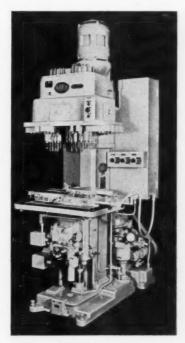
Natco H-6 multi-spindle drilling and tapping machine available with selective cycle control
